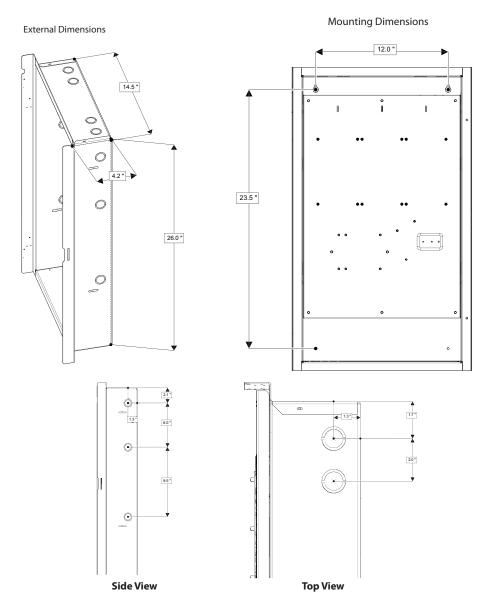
BBX-1024DS and BBX-1024DSR Installation Instructions and Dimensions
